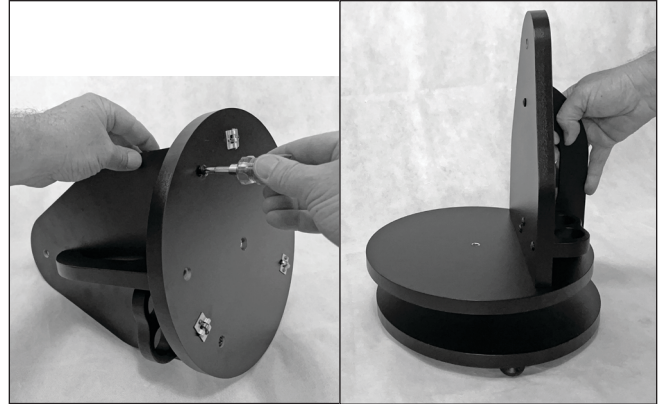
Attach the side panel assembly to the top ground plate with three assembly screws
